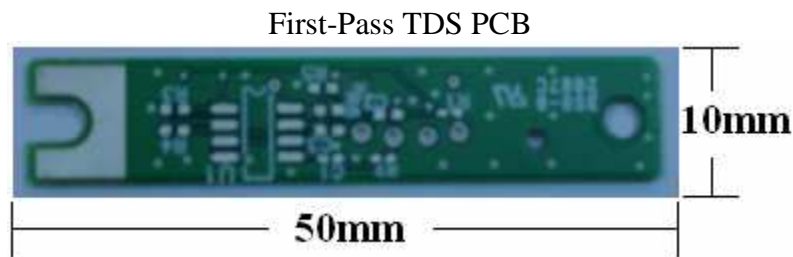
The first-pass TDS PCB. The TDS PCB was developed for an assessment of the TDS output to optimize the signal.
